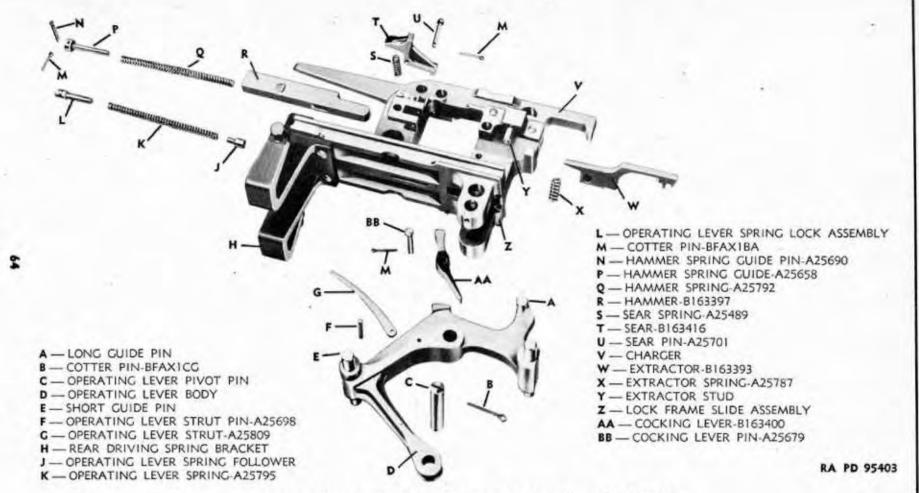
Parts of Lock Frame Assembly (Gun M10)
